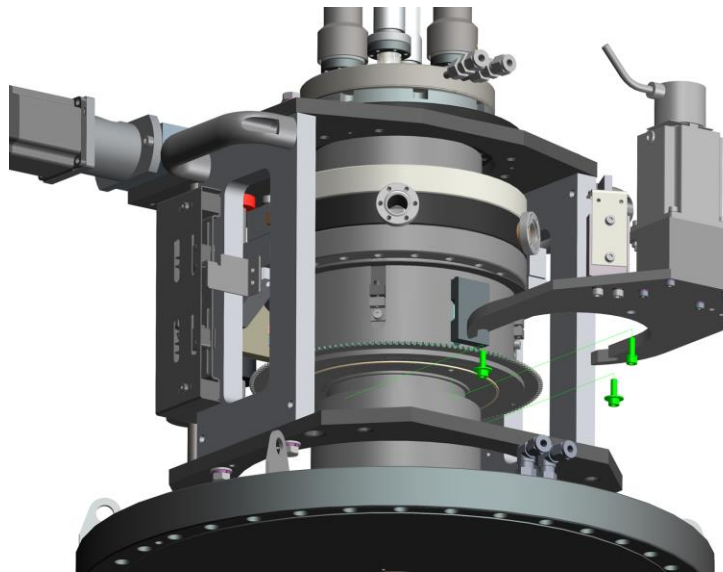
Schematic showing how to remove the rotatory stepper motor (automated transfer system).
